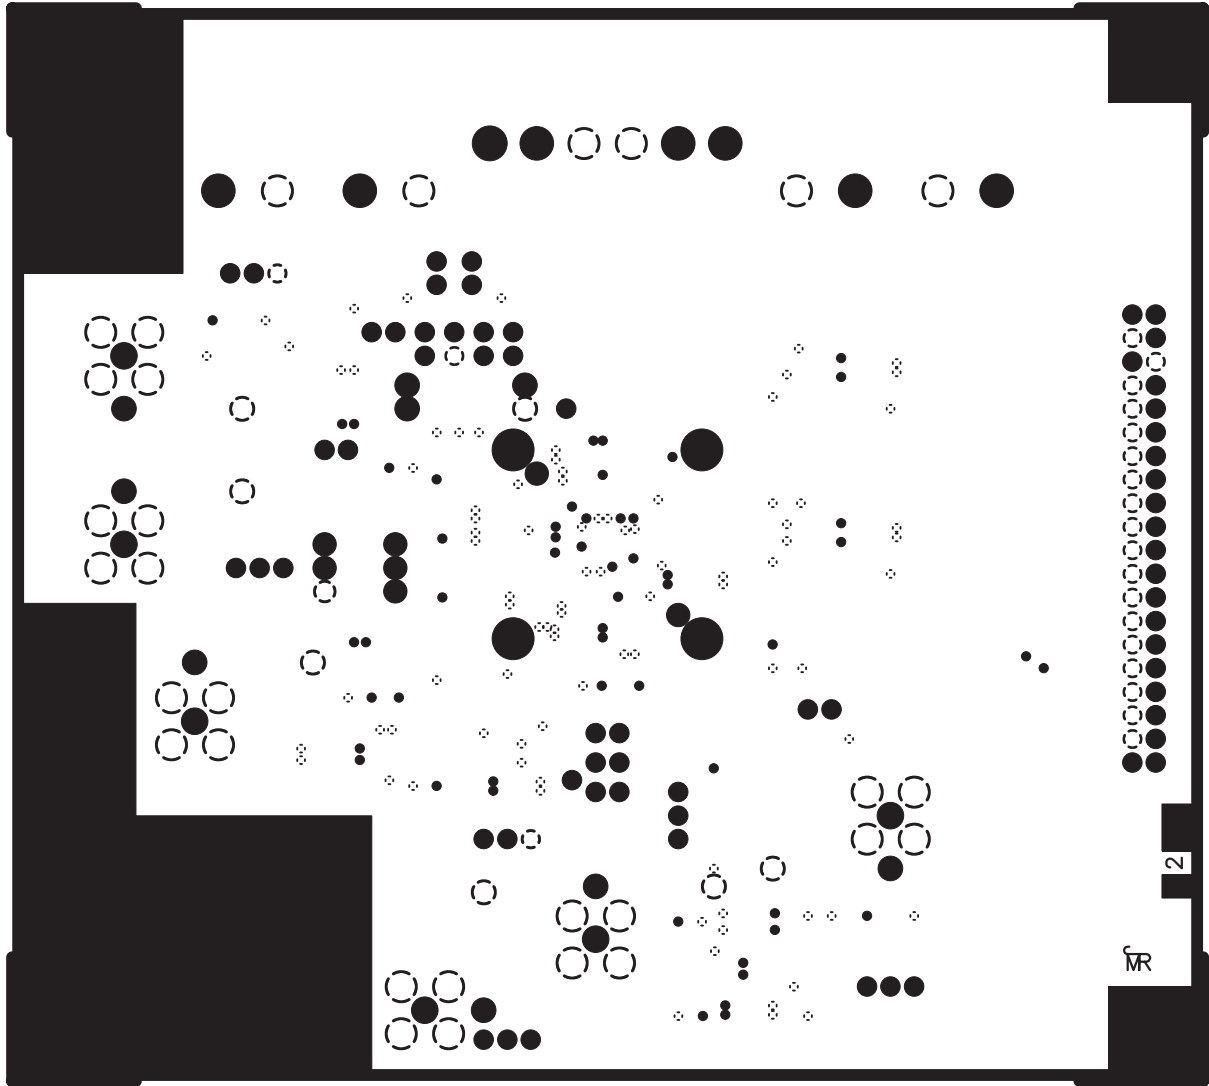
AD9244 Evaluation Board, PCB Layer 2 (Ground Plane)
